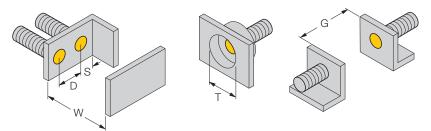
Minimum mounting distances - Cylinder designs, flush mounting possible
